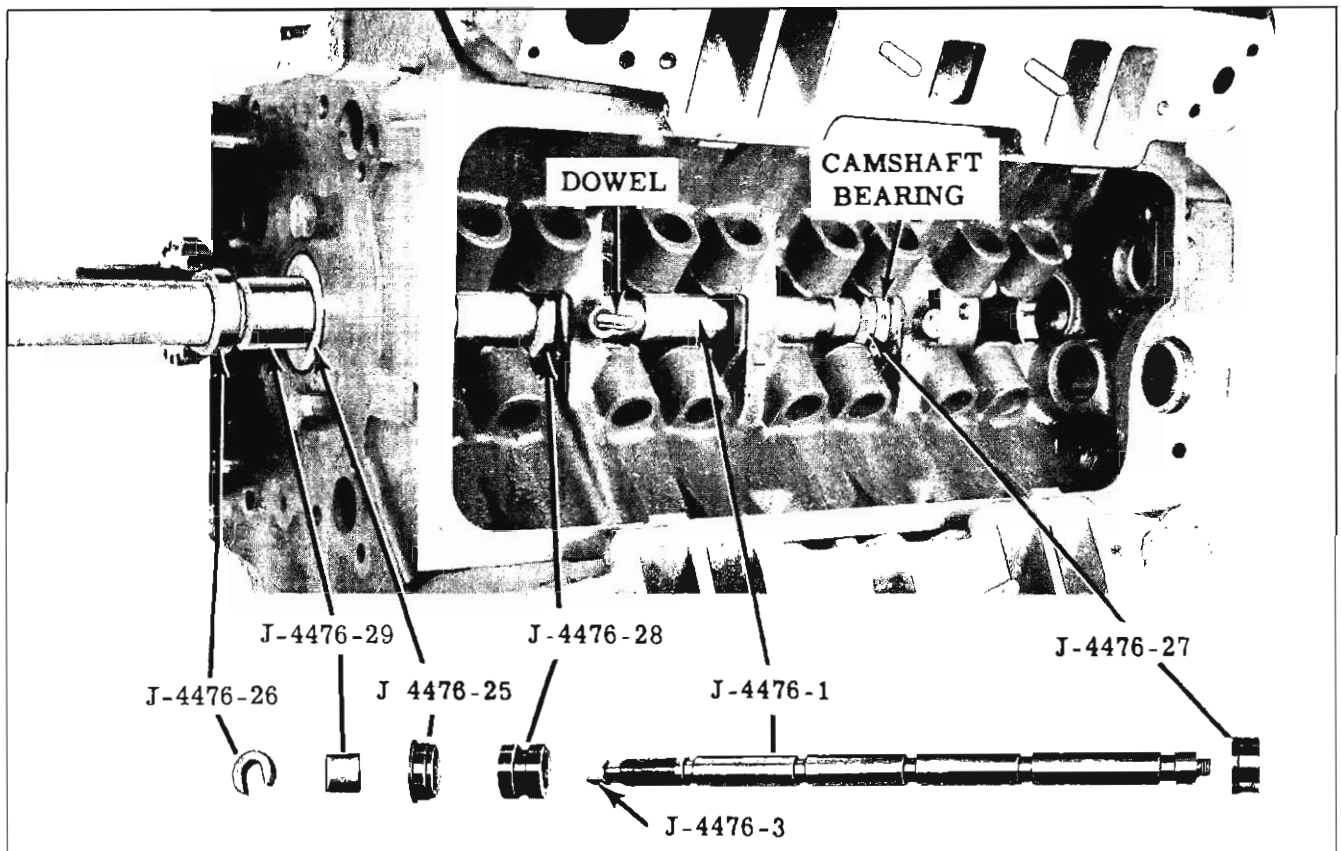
Installing No. 4 Camshaft Bearing (Typical of 3 and 2)
